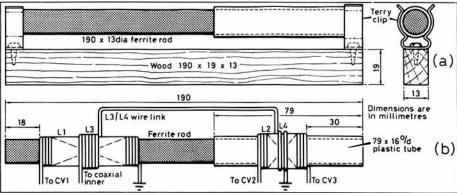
Winding details and sizes for the ferrite rod and coil assembly.
